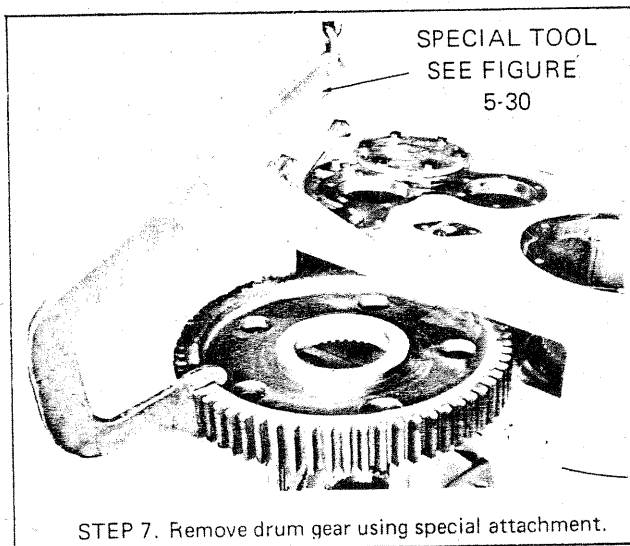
REMOVAL OF DRUM SHAFT AND DRUM (Sheet 2 of 2)
